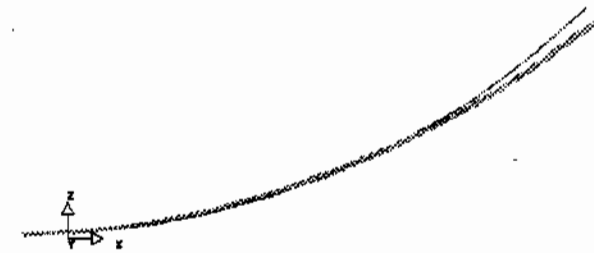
Plate shape before and after spring-back comparatively to desired shape (continuous assembly)
